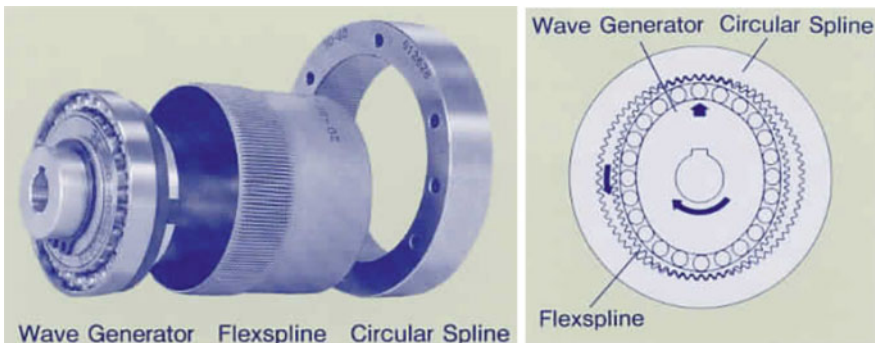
The geared design of Harmonic Drive invented in 1960s [13]
